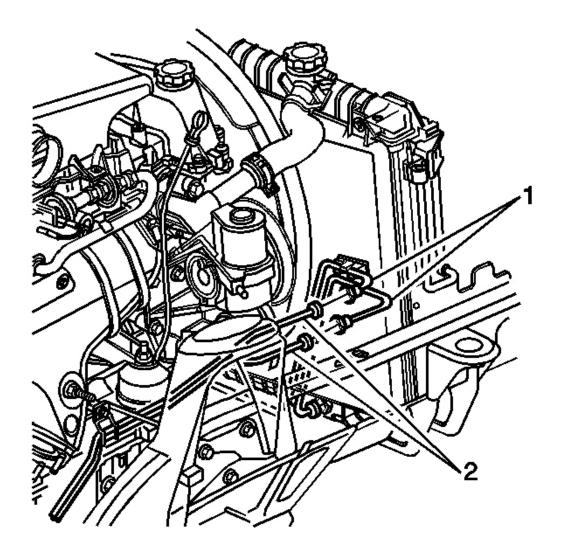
View Of Rear Oil Cooler Lines & Front Oil Cooler Lines Courtesy of GENERAL MOTORS CORP.
